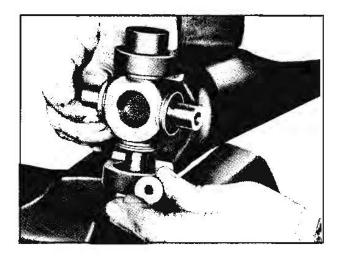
A-7 Placing Washers Inside Bearing of Fixed Yoke Member
